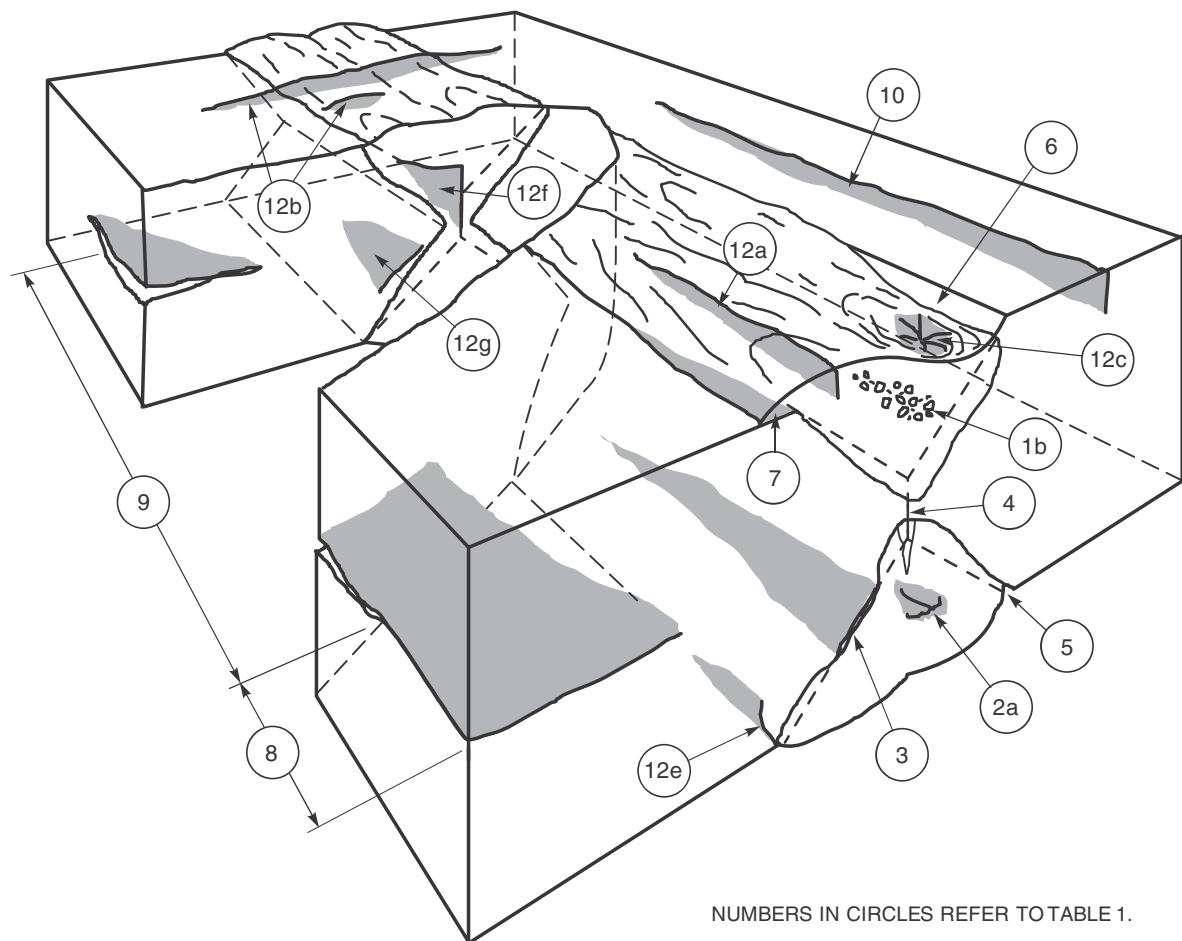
Double-V-Groove Weld in Butt Joint
